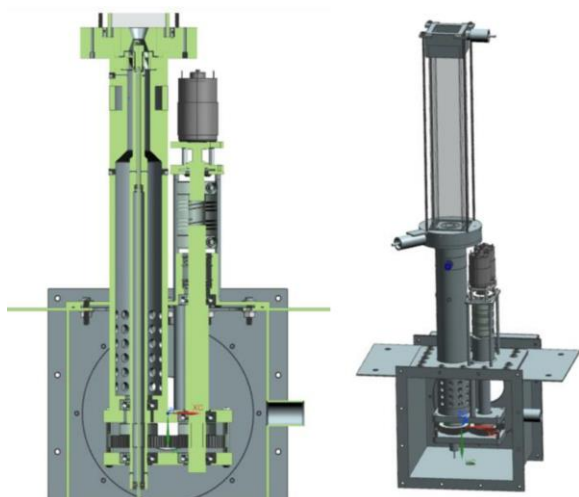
Cross section and 3D model of the combustion testing apparatus with DRS included.
